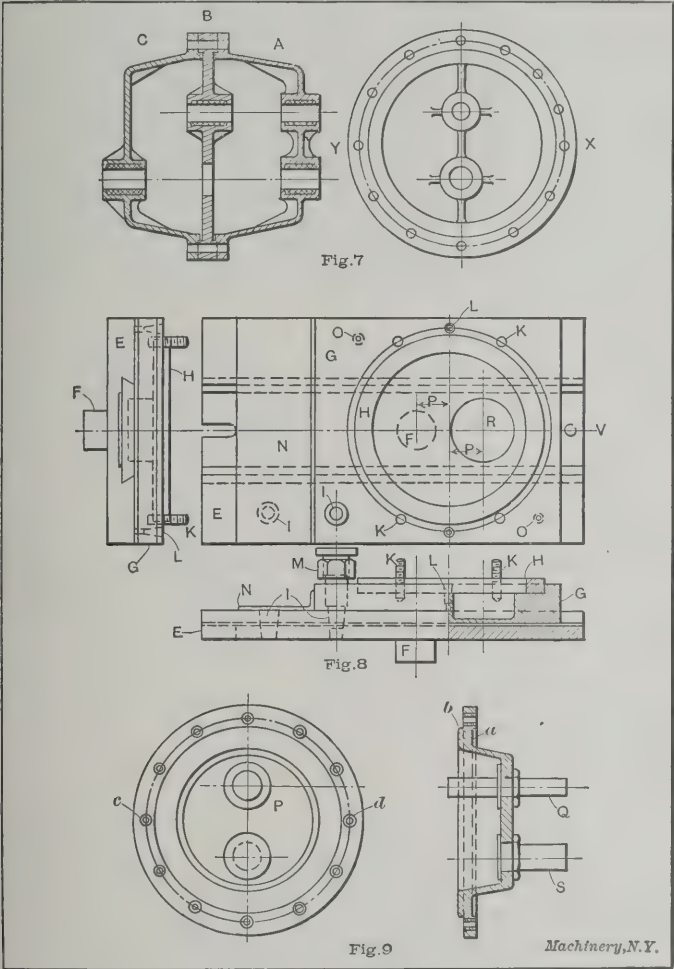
Casing with Drilled Flanges and Bored Bearings. Fig. 8. Jig in which Bearings are bored. Fig. 9. Jig in which Flanges are drilled
